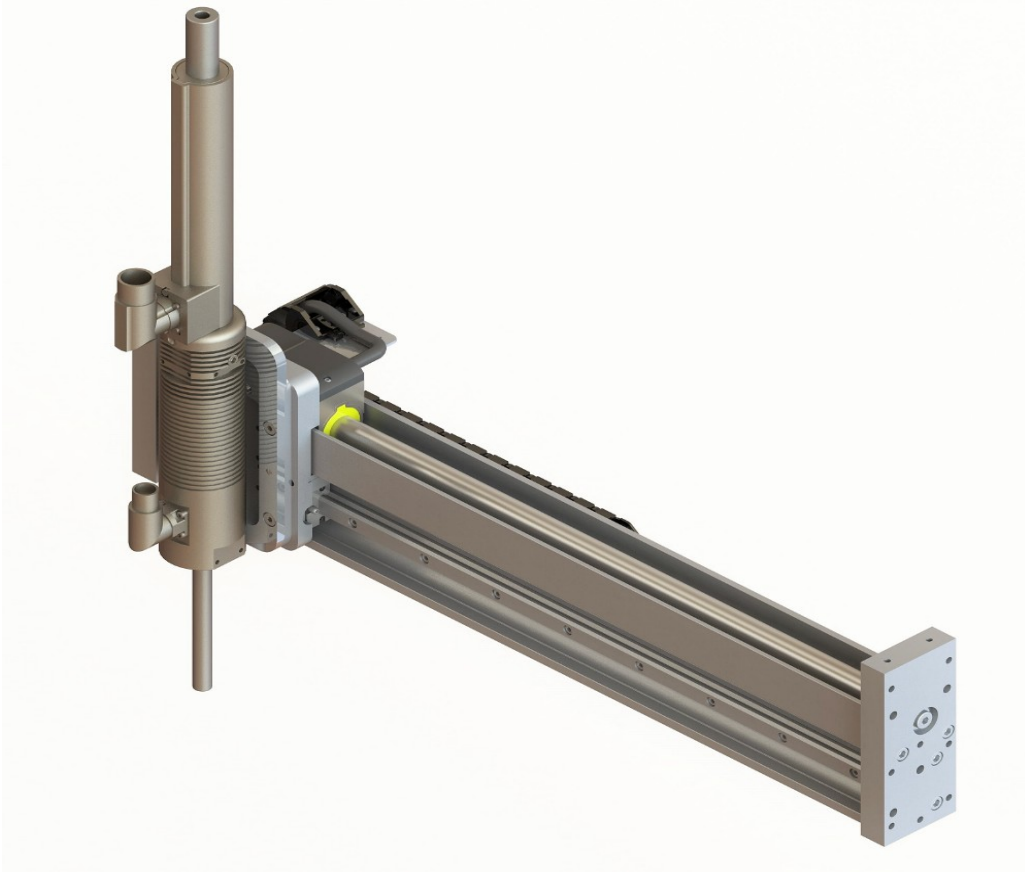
F01-37S Guide with mounted linear rotary motor PR01-52
